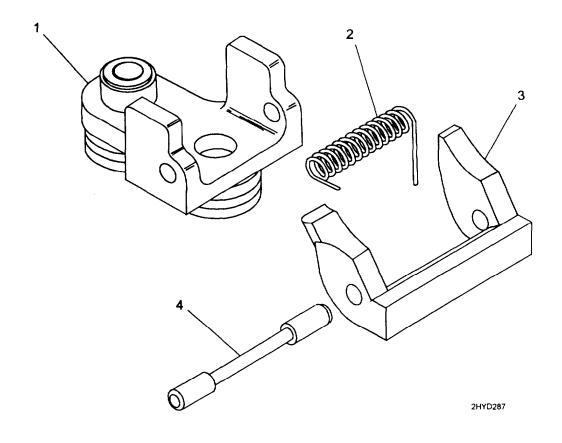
Group 0803 Feed Pawl Assembly, PN 7269120
